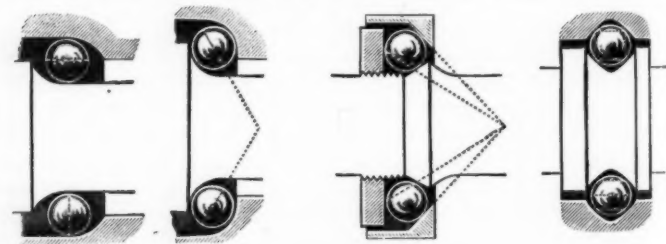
Faulty designs of 2, 3 and 4 point bearings.
